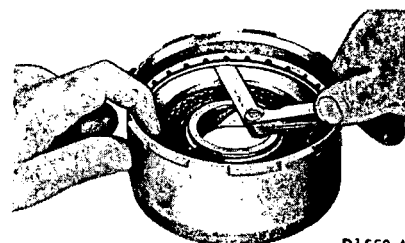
Checking Reverse-High Clutch Snap Ring Clearance
